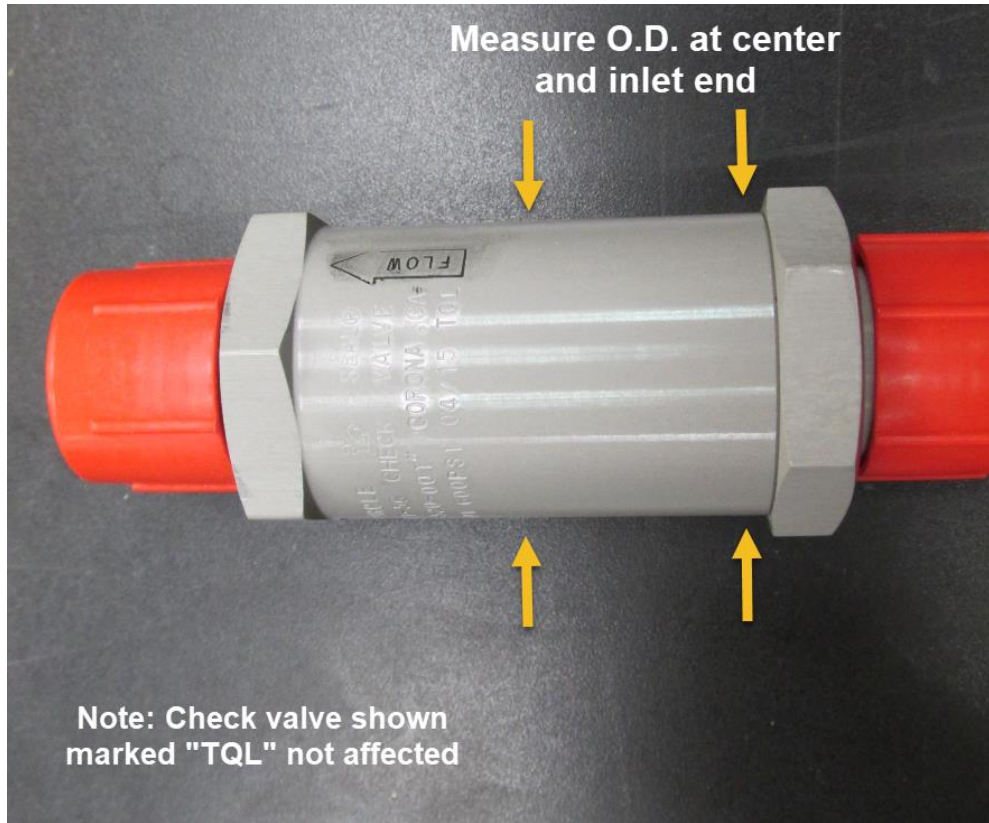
Transmission Oil Check Valve Outside Diameter Measurement
